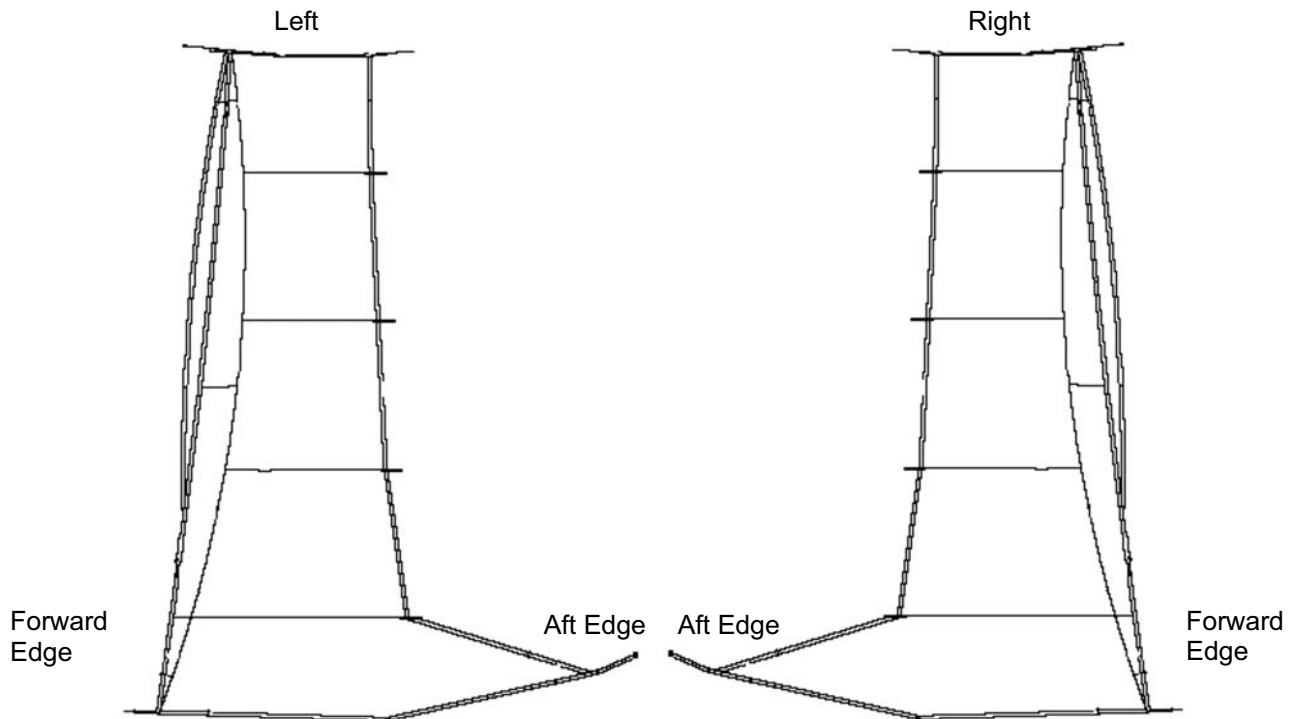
Identifying a Left and Right Extended Gore Assembly.
